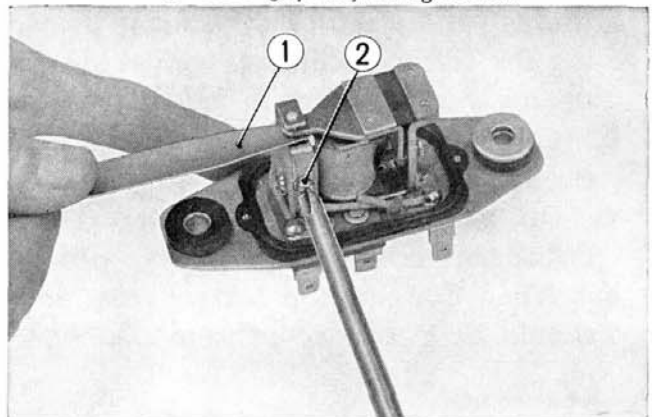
① Thickness gauge ② Point gap lock screw
